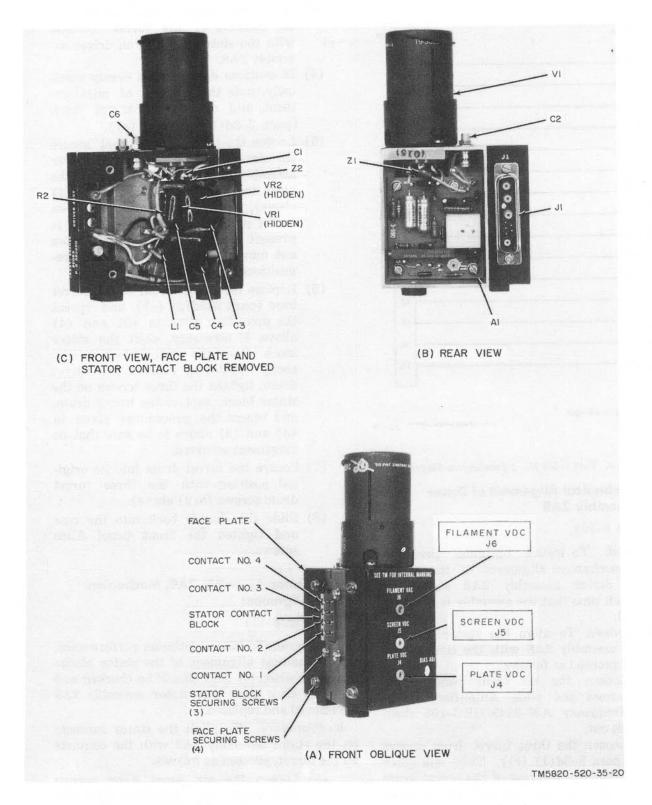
Driver assembly 2A8, mechanical alignment and component location.
